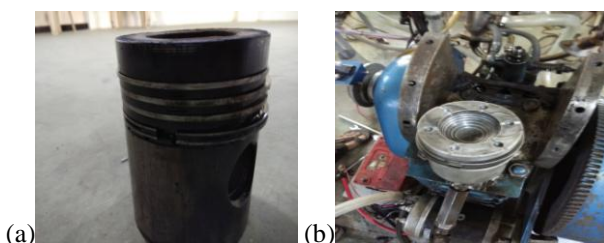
(a) Front view of Piston (b) Grooved Piston Arrangement in Cylinder
